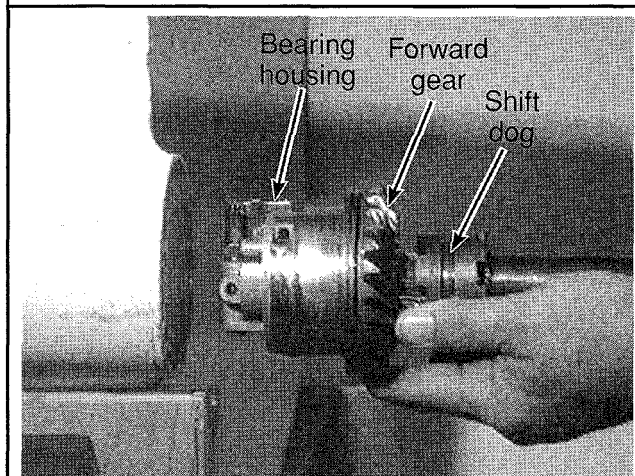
the shift dog, forward gear and bearing housing will come out with the shaft
